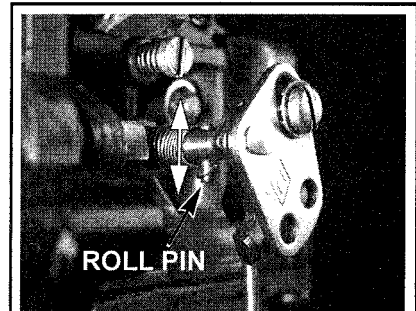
The roll pins in the carburetor throttle shafts must be completely vertical at WOT
